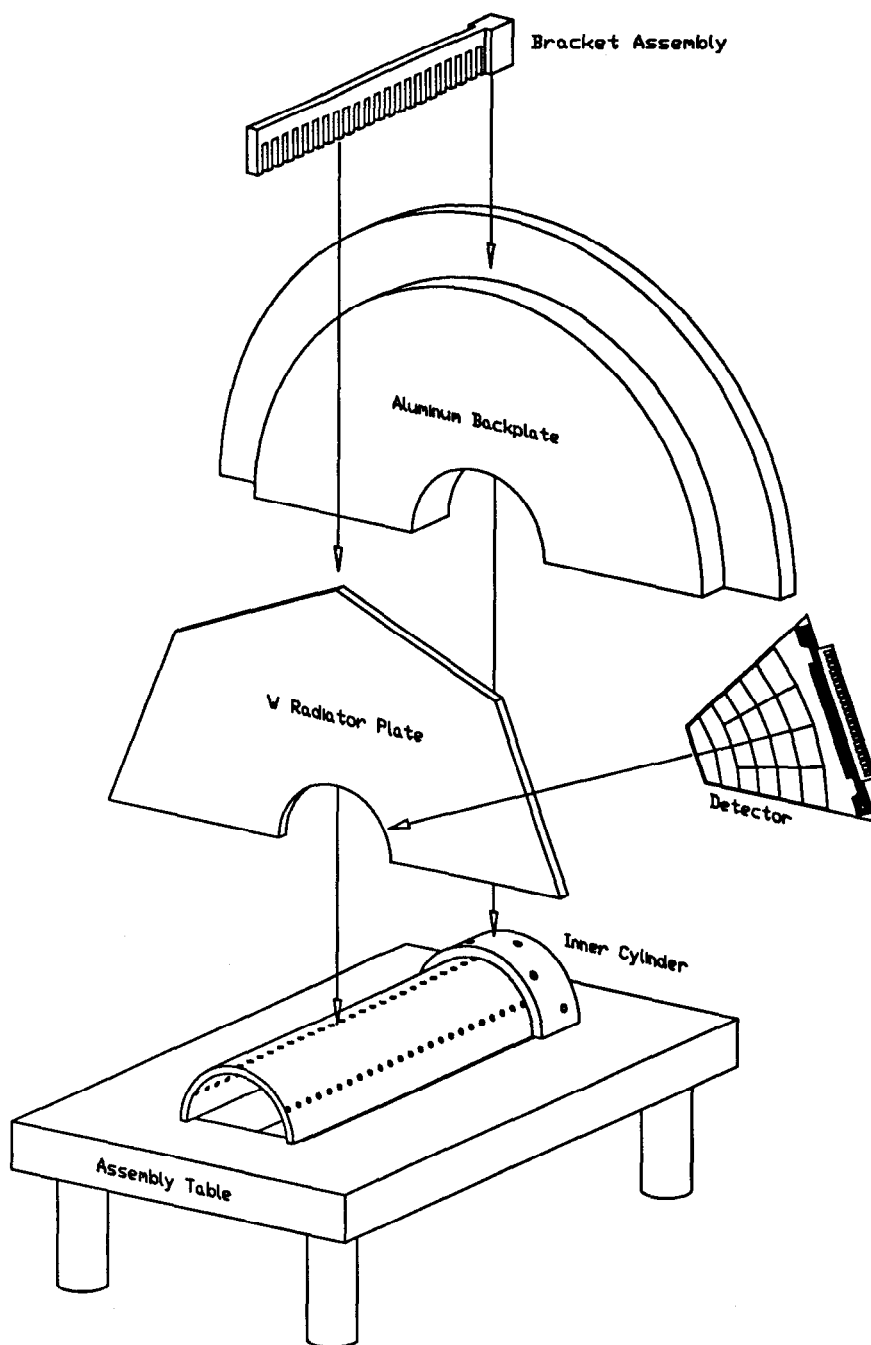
An exploded view of one Luminosity Monitor module assembly. The inner cylinder rests upon the assembly table while the the backplate and 23 tungsten radiator plates (only one is shown here) are attached with screws extending outward radially through the cylinder. The bracket assembly is then attached for additional strength and to maintain proper spacing. The detectors are inserted between the radiator plates and secured into place with a brass bar which holds the delrin pins by compression. (The bar and pins are not shown in this picture.)
